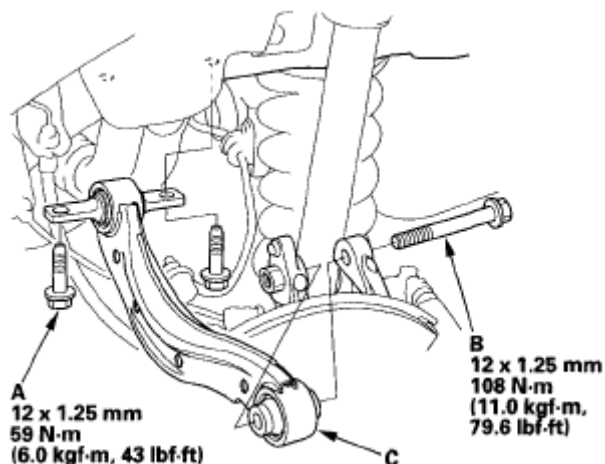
Identifying Flange Bolts From Vehicle (With Torque Specifications)
